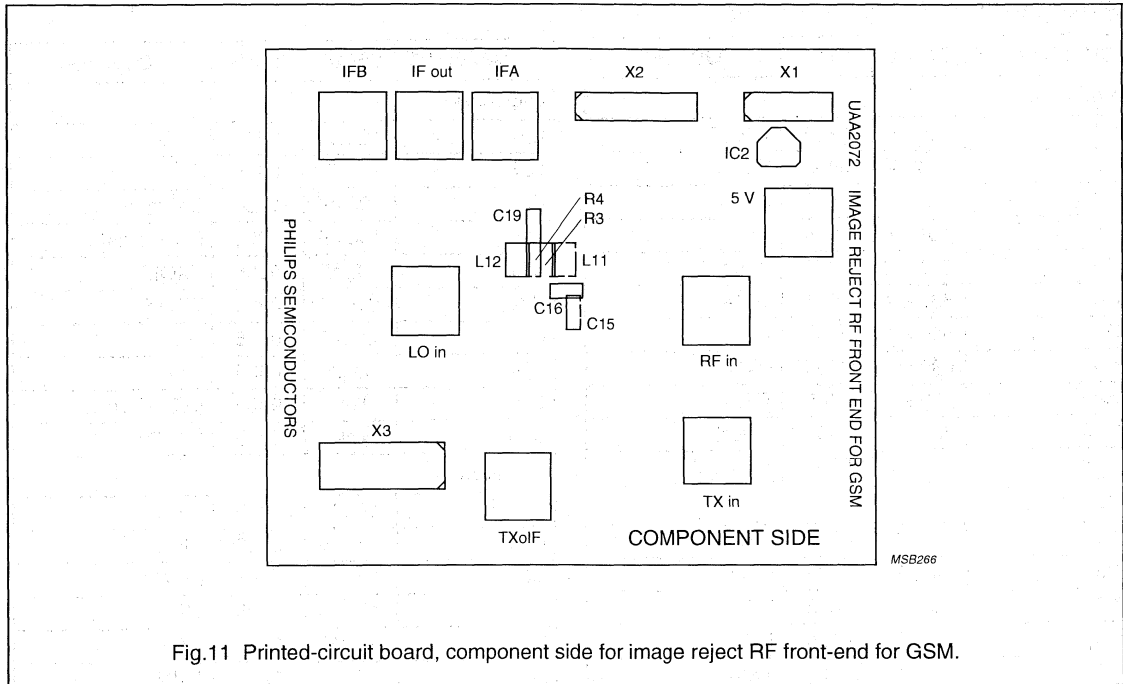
Printed-circuit board, component side for image reject RF front-end for GSM.
